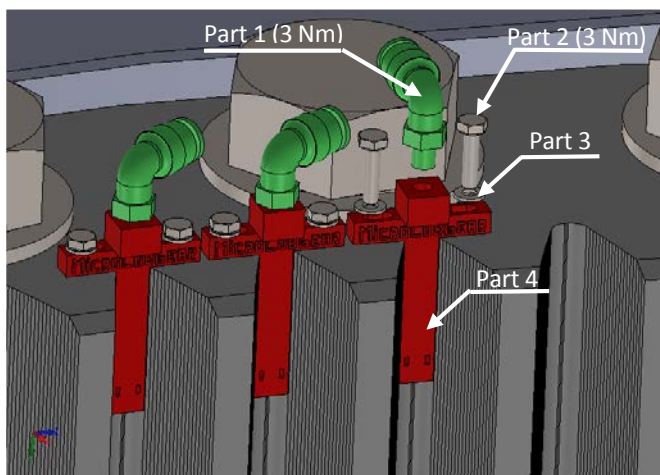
MiCRoLuBGeaR directly bolted to the Pitch bearing
